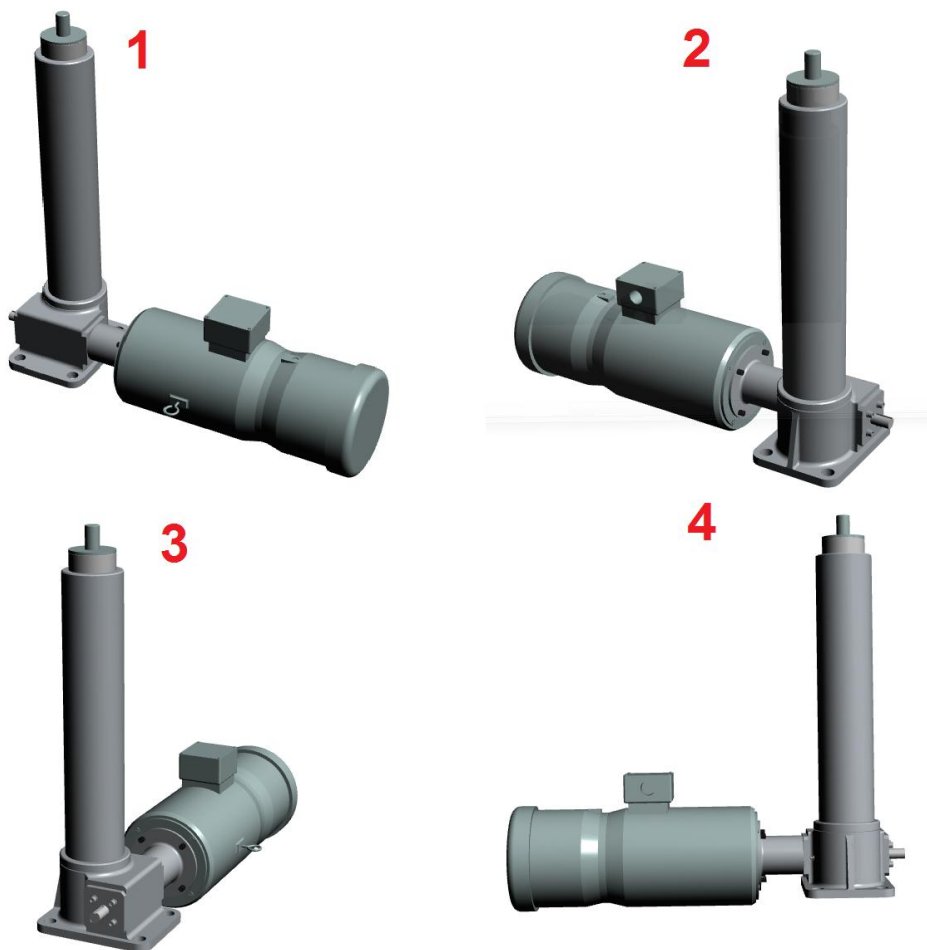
10 – 3D sketch of the electric cylinder with motor
